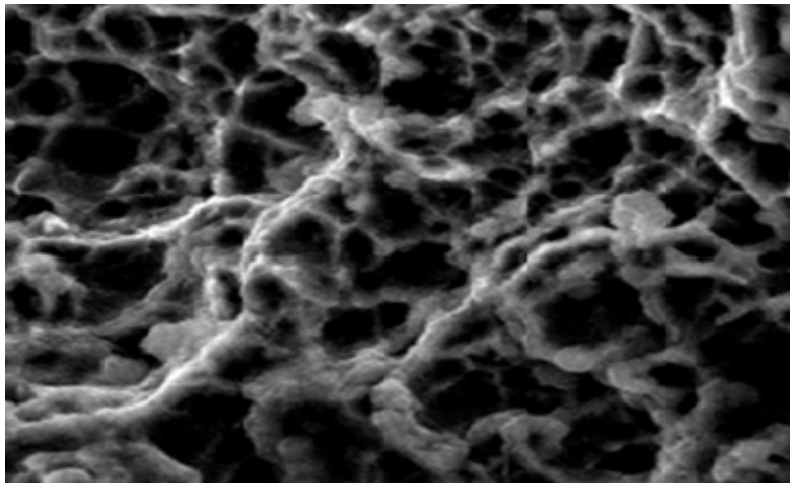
SEM measurement at x1000 magnification for specimen after breakage of tensile test which weld from by using welding flux (ii)
